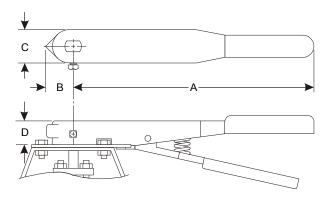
Dimensions for Ten-Position Manual Handles (Refer to Table 10.)
